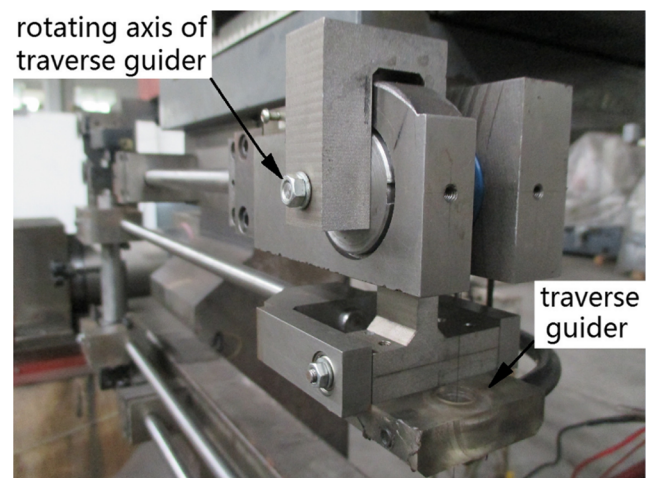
Physical picture of the wire-guiding mechanism that causes wear but no “angular error”
